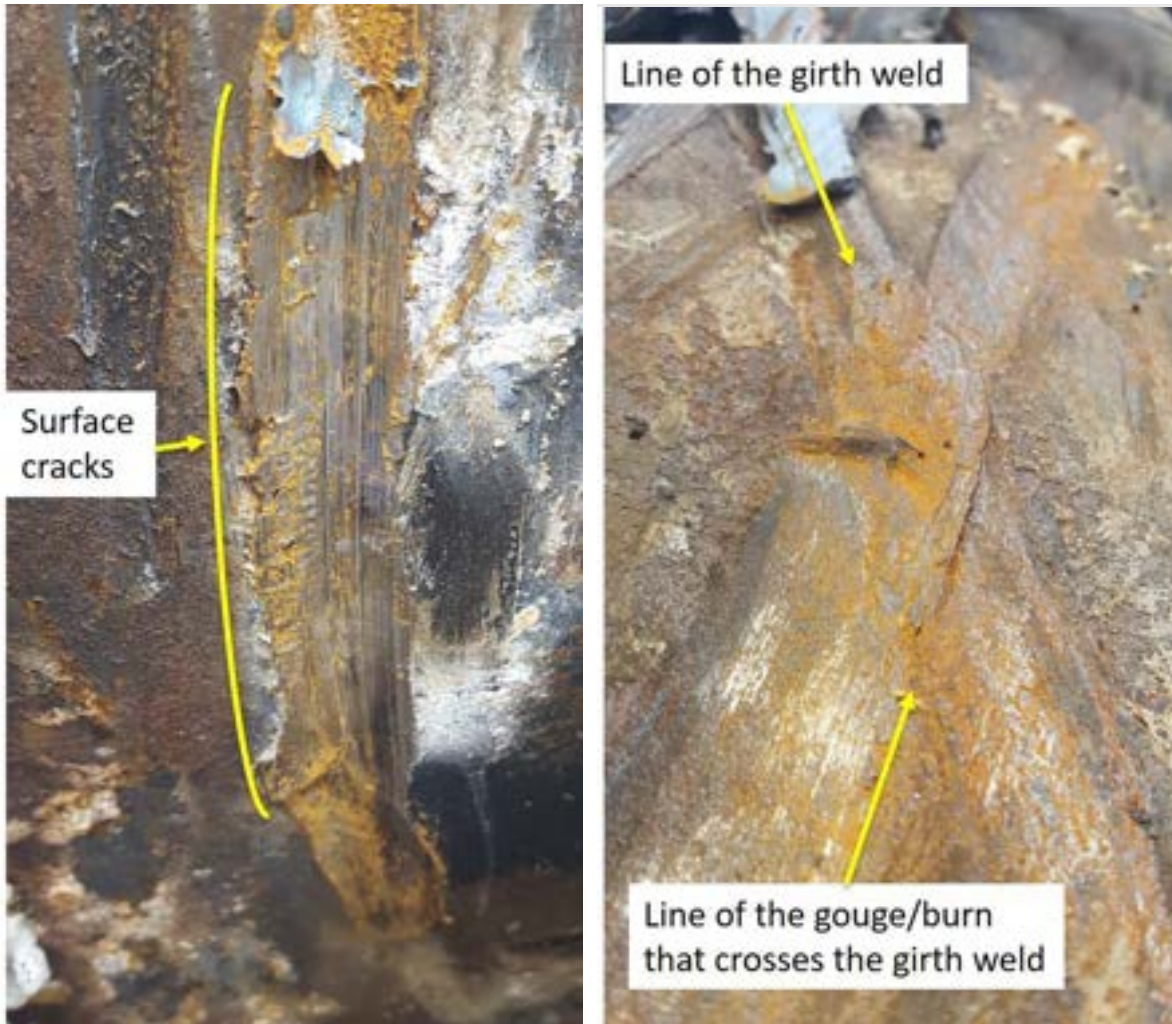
Damage on the exterior of the tank shell, under jacket damage; DOT 105J300W car is illustrated in Figure 21.²³
